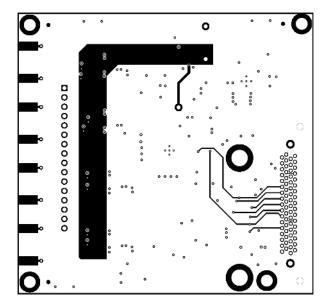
ADS8332EVMV2 PCB Layer 3: Power Planes
